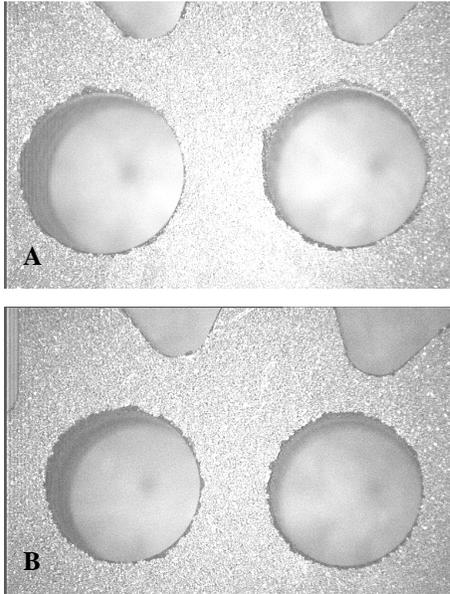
Break-out at the exit of 6.35 mm diameter holes drilled at a feed rate of 0.2 mm/rev and a cutting speed of 3420 rpm cured at 230°C for A) 0.5 h and B) 1.0 h.
